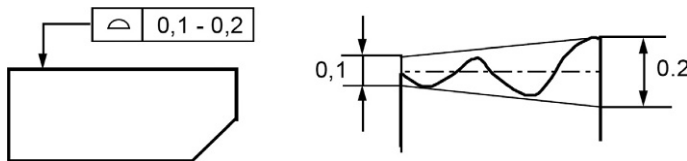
Linearly varying tolerance zone, ISO 1101
